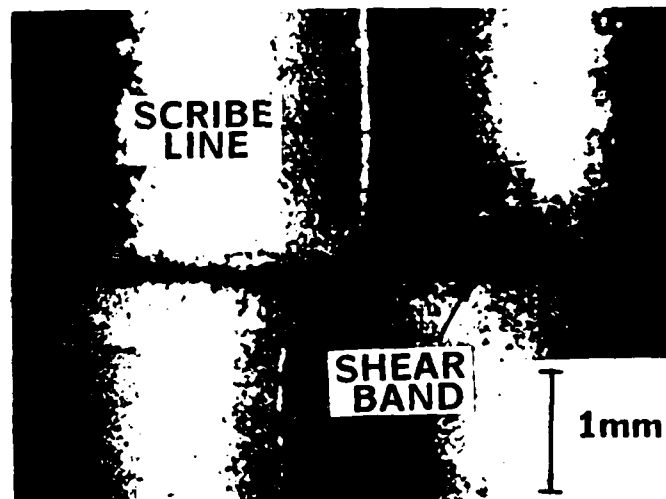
Shear Band and Partial Fracture in AISI 1018 Cold Rolled Steel (Specimen No. 96)
